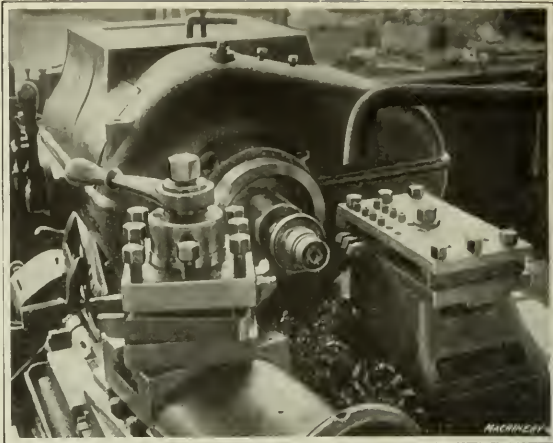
Manufacturing Lathe Set-up for turning Roller-bearing Cone
